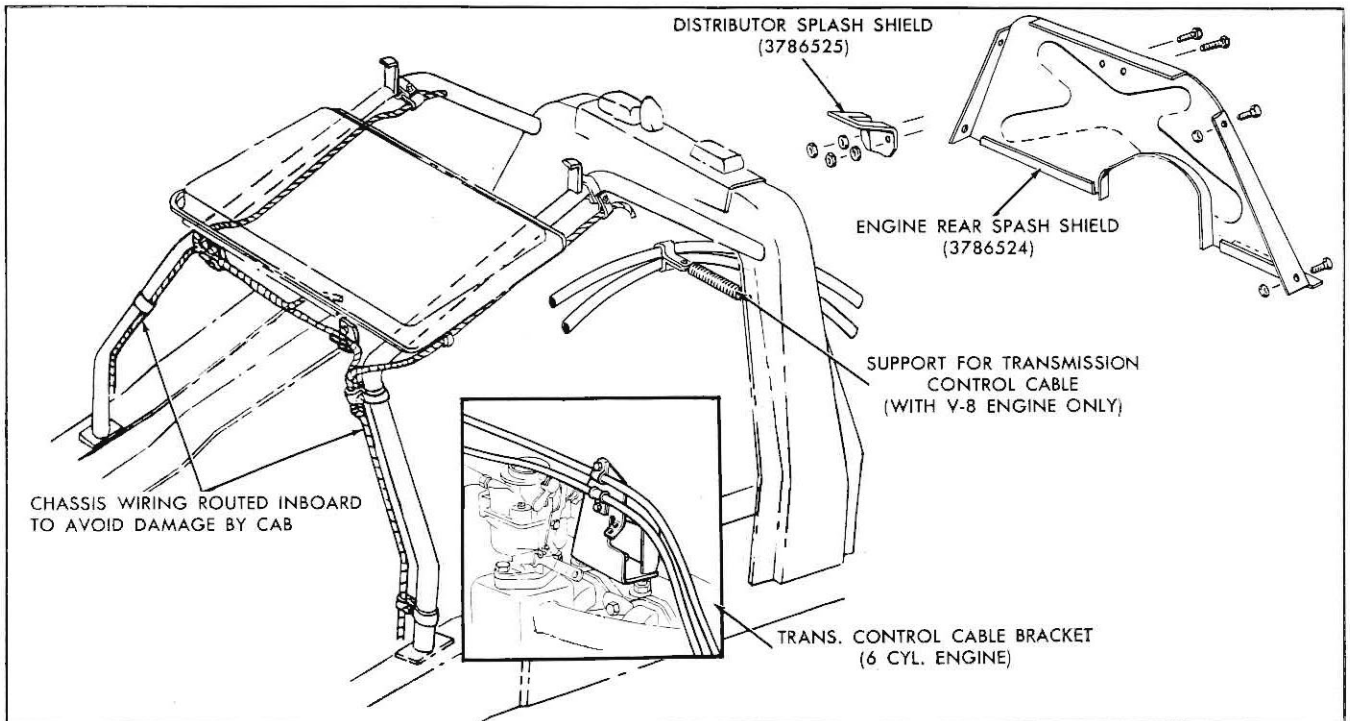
Tilt Cab—Chassis Wiring, Transmission Cable Supports, and Splash Shields
